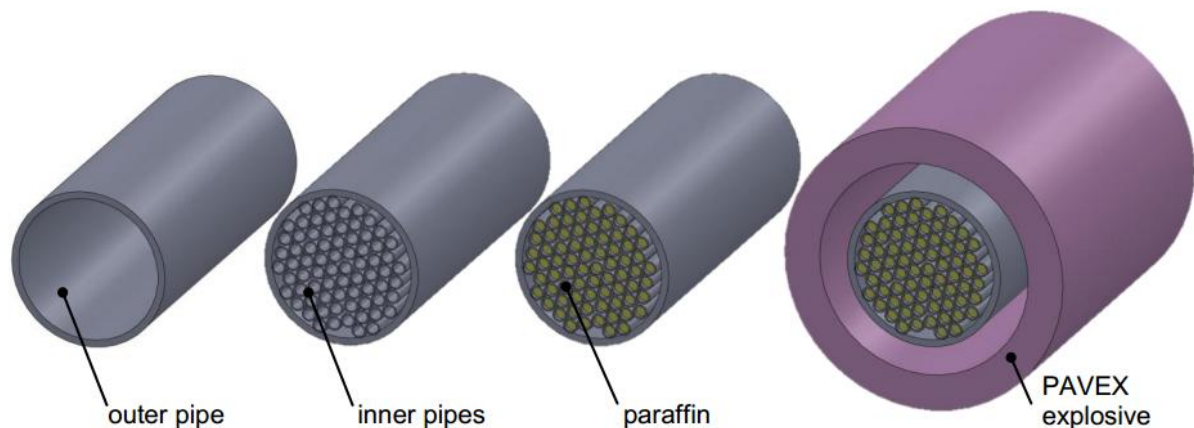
Explosive welding procedure for UniPore manufacturing. [17]
